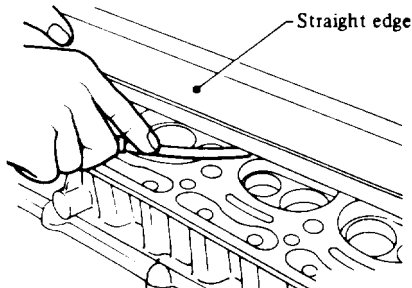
Measuring Cylinder Head Fire Deck (Block Contact Surface) for Warp
